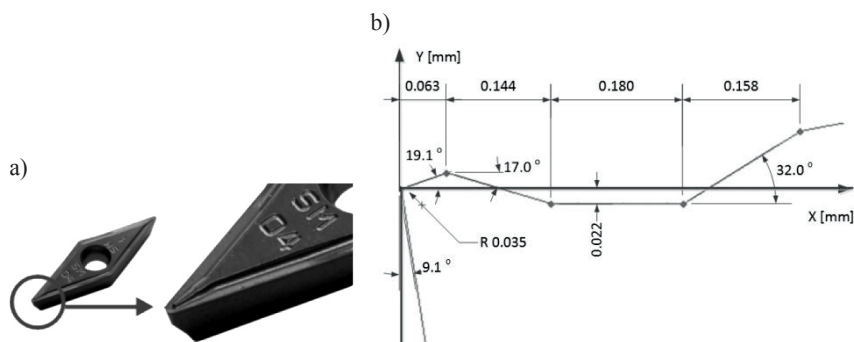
Insert VCMT 160404-SM IC 90; a) general view, b) measured dimensions of chip breaker type SM [7]
